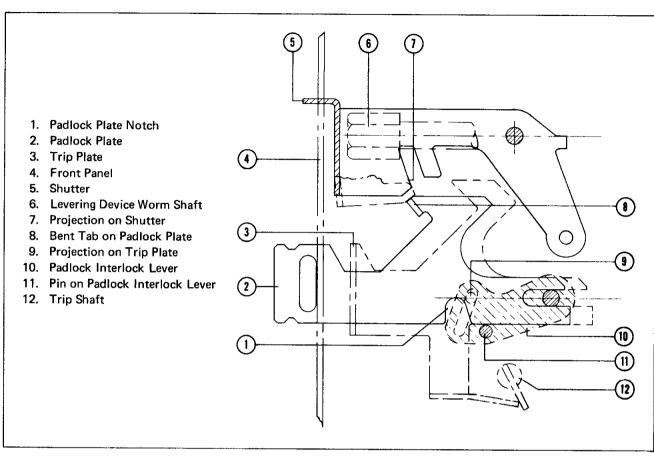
Padlock Device - Locked Trip Free and Shutter Raised
